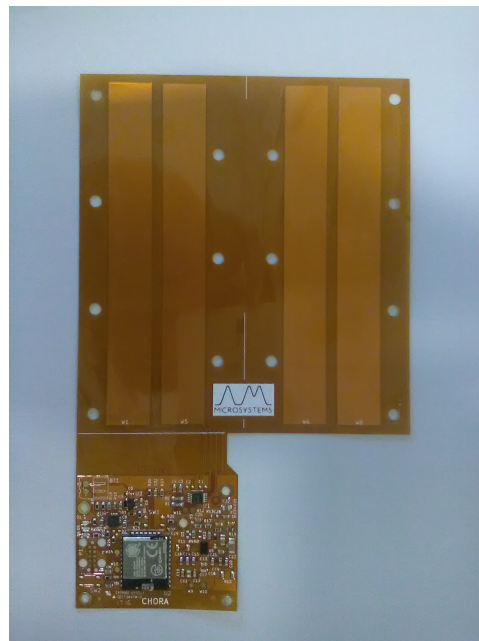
Liquid level sensor PCB made in kapton with mounted components.
